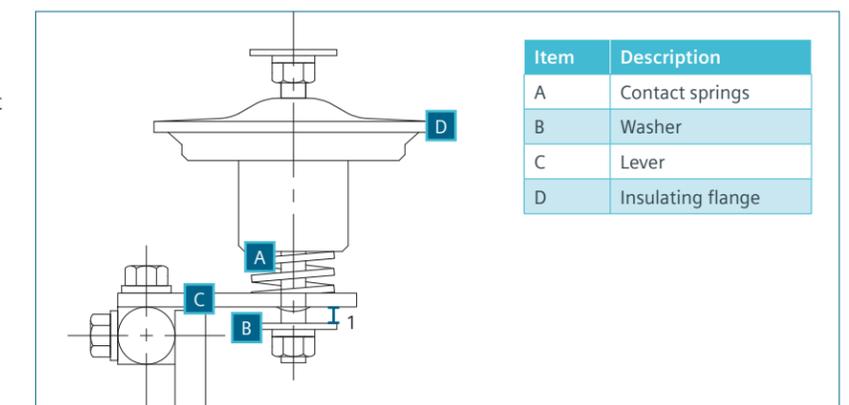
Type 12SVC400 (400 A) contactor - control module removal
